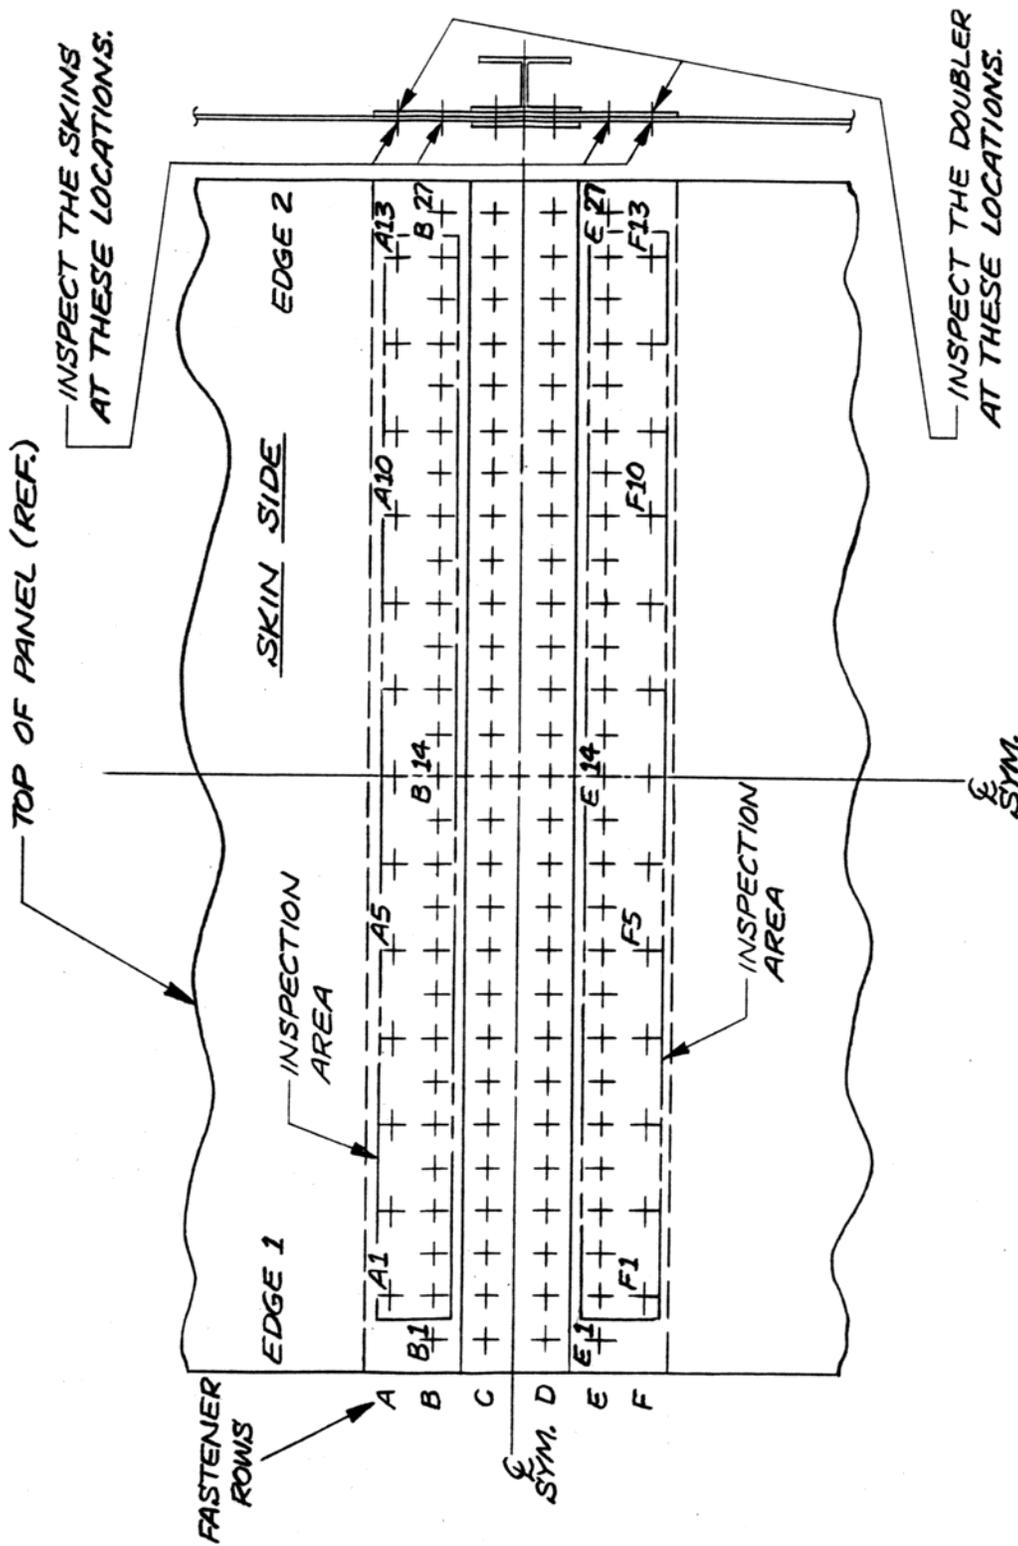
EIFS PANELS INSPECTION AREA AND RIVET NUMBERING
